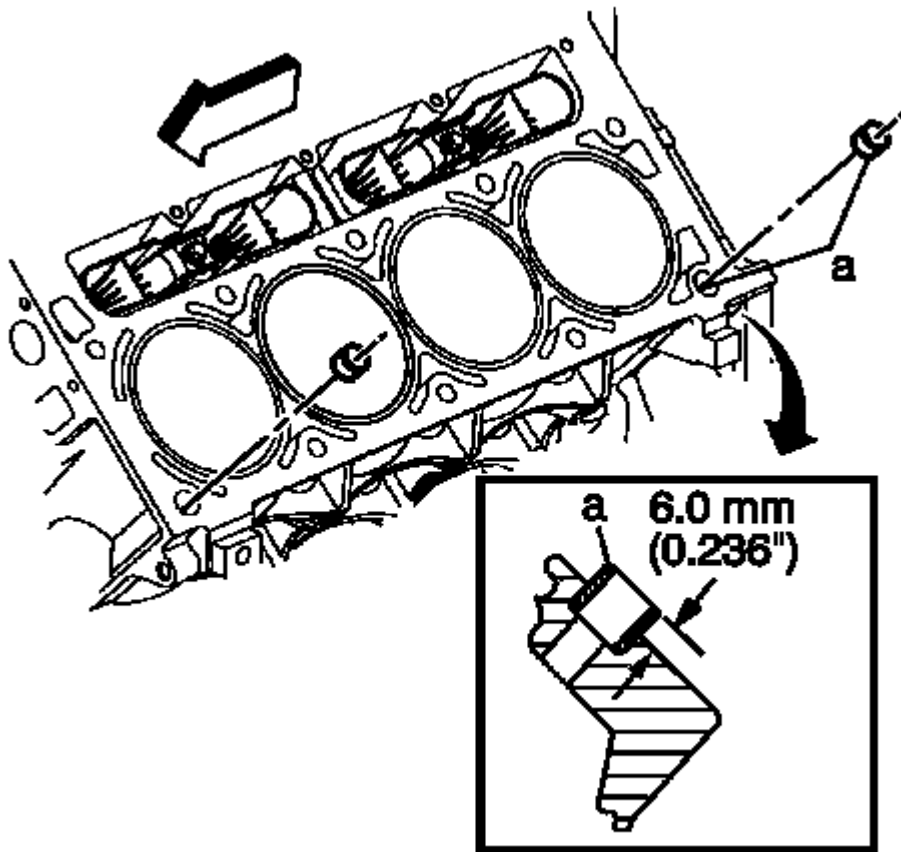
Cylinder Head Bolt Holes And Locating Pins
